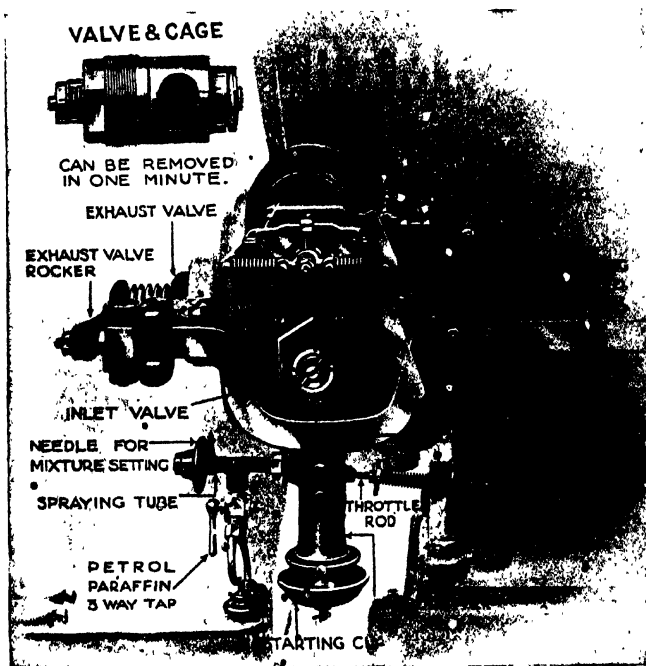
SHOWING PARAFFIN CARBURETTER, LOW-TENSION MAGNETO, AND VALVE MECHANISM OF BAMFORD ENGINE: INLET VALVE IS AUTOMATIC. [Bamfords.]
